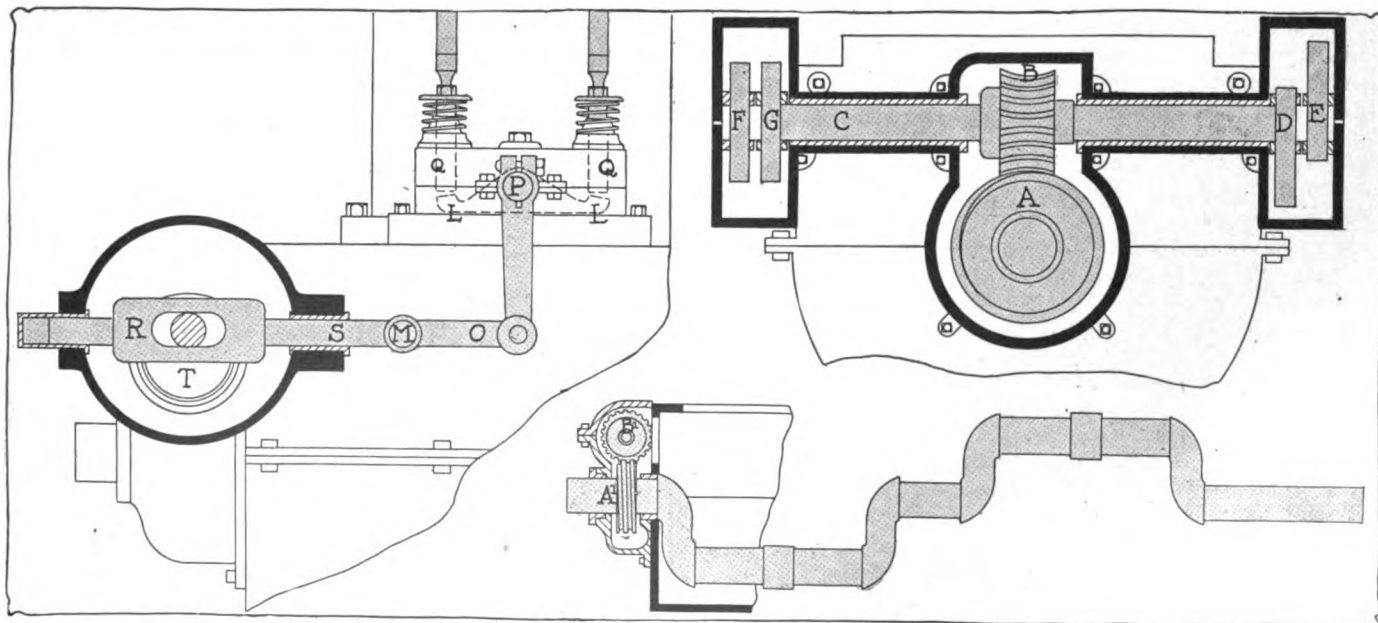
Worm-driven valve action designed to silence motor. Three views are shown, end, rear and front
